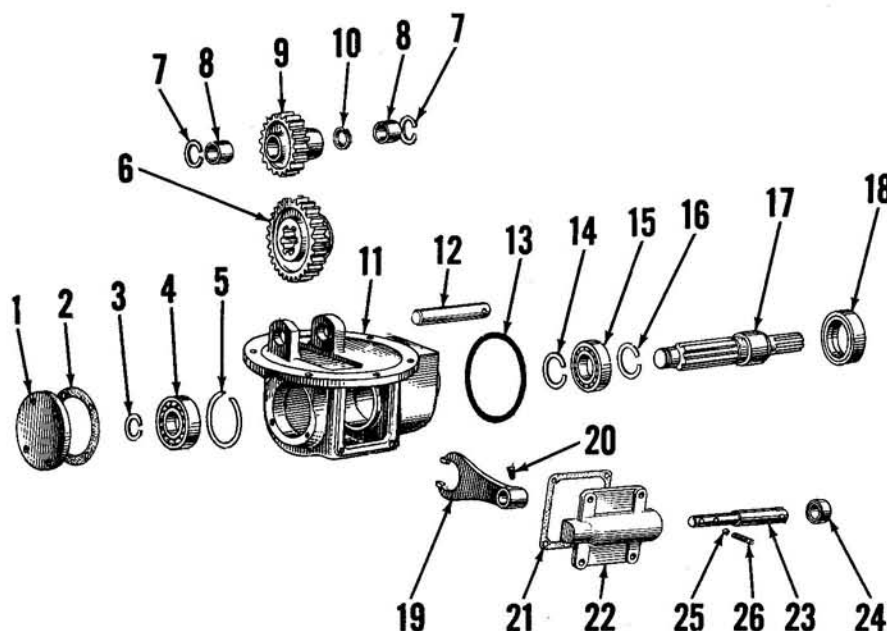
Exploded view of PTO gearbox. Refer to Fig. 171 for cross-sectional view of latest type idler gear and bearing assembly and to Fig. 169 for cross-sectional view of complete drive gear train.
